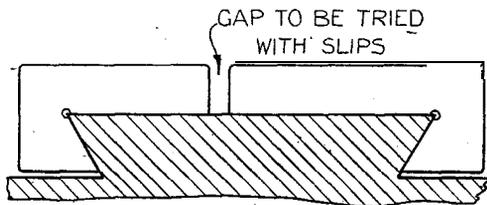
A profile-gauge in two parts for gauging a male slide.
